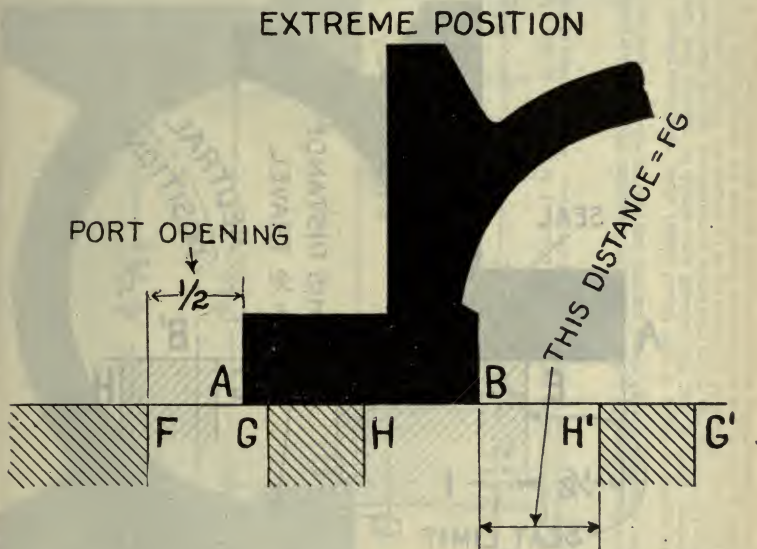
How to lay out the slide valve. II. The width of the exhaust port is obtained by sketching one end of the valve in extreme position for admission. Evidently H' , must be so located that $B H' = F G$, in order not to choke the exhaust.
